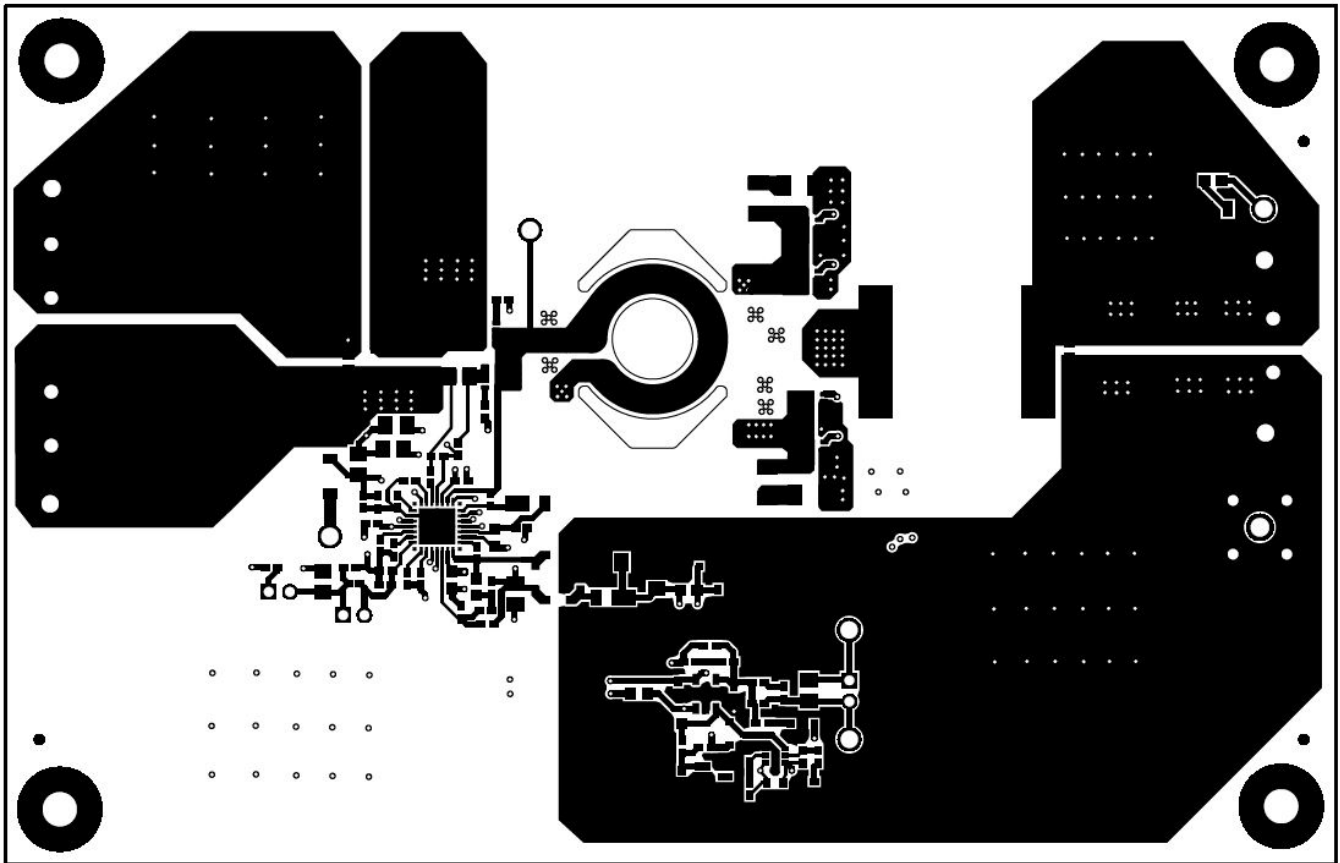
LM5036 EVM: Layer 1 PCB Assembly layout
